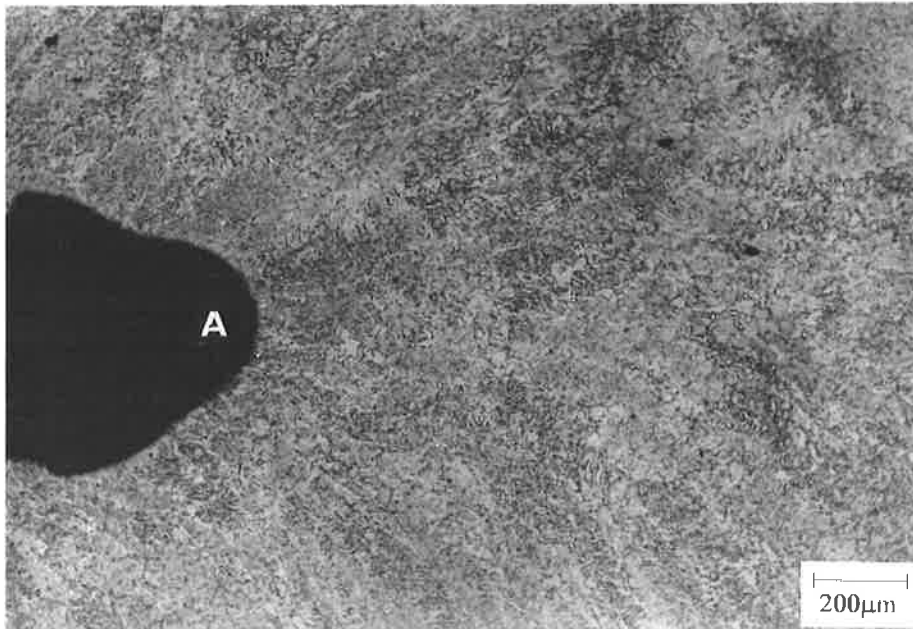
Optical micrograph of a longitudinal horizontal section of a weld, etched in 2% nital. A hollow bead pore is shown to nucleate and propagate at the weld centreline. Welding conditions: weld travel speed 400mm/min and welding current 180A, root gap 1.3mm and root face 2.0mm.
